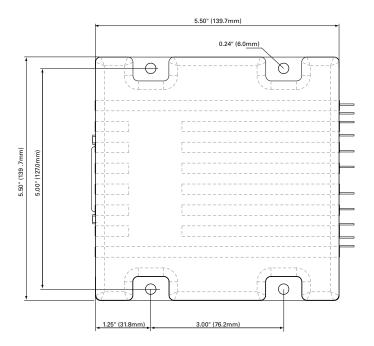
FBLG2360T top view and dimensionsMechanical Specifications
